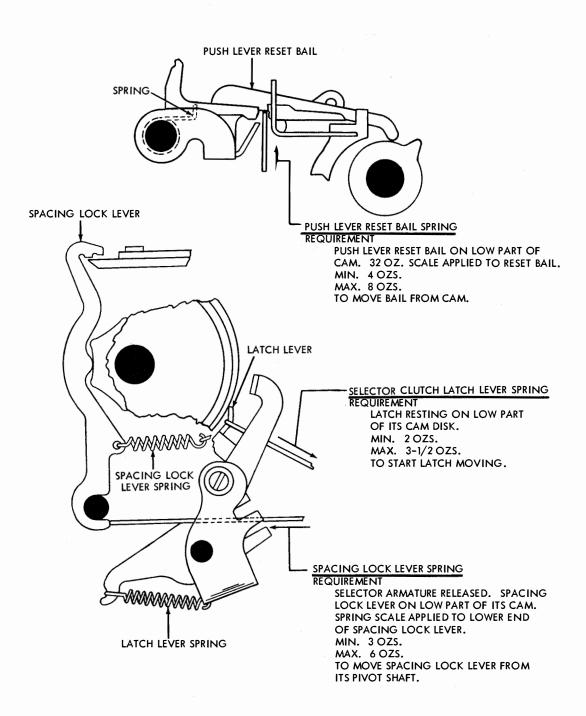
TYPING UNIT, SELECTOR CLUTCH MECHANISM, RIGHT SIDE VIEW
